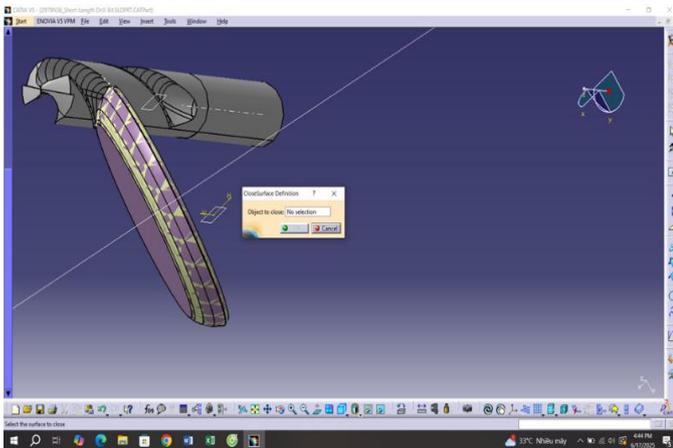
Grinding disk 3D Solid was created in CATIA (D=50)
